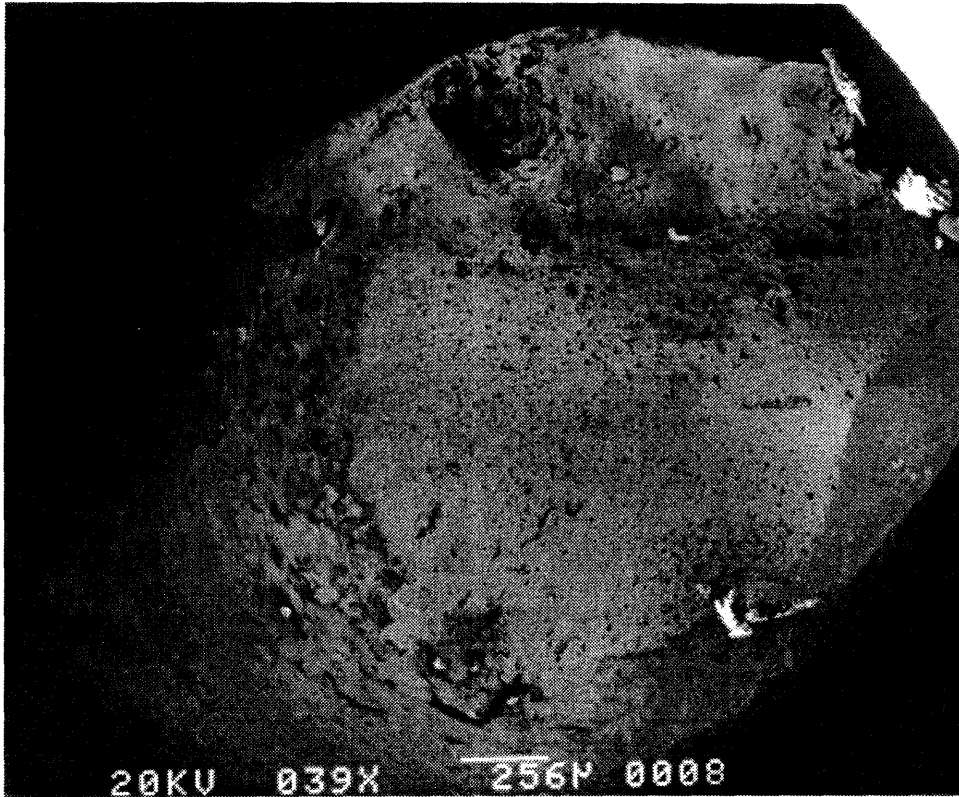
Fracture surface of specimen 82 (CP 304,AJ9139, 0.8×10^{25} n/m²).
